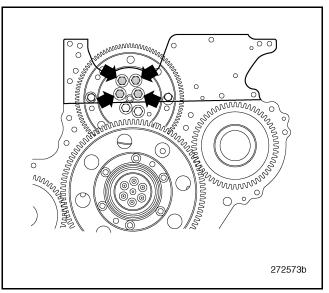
Upper Four Adjustable Idler Gear Hub Screws
